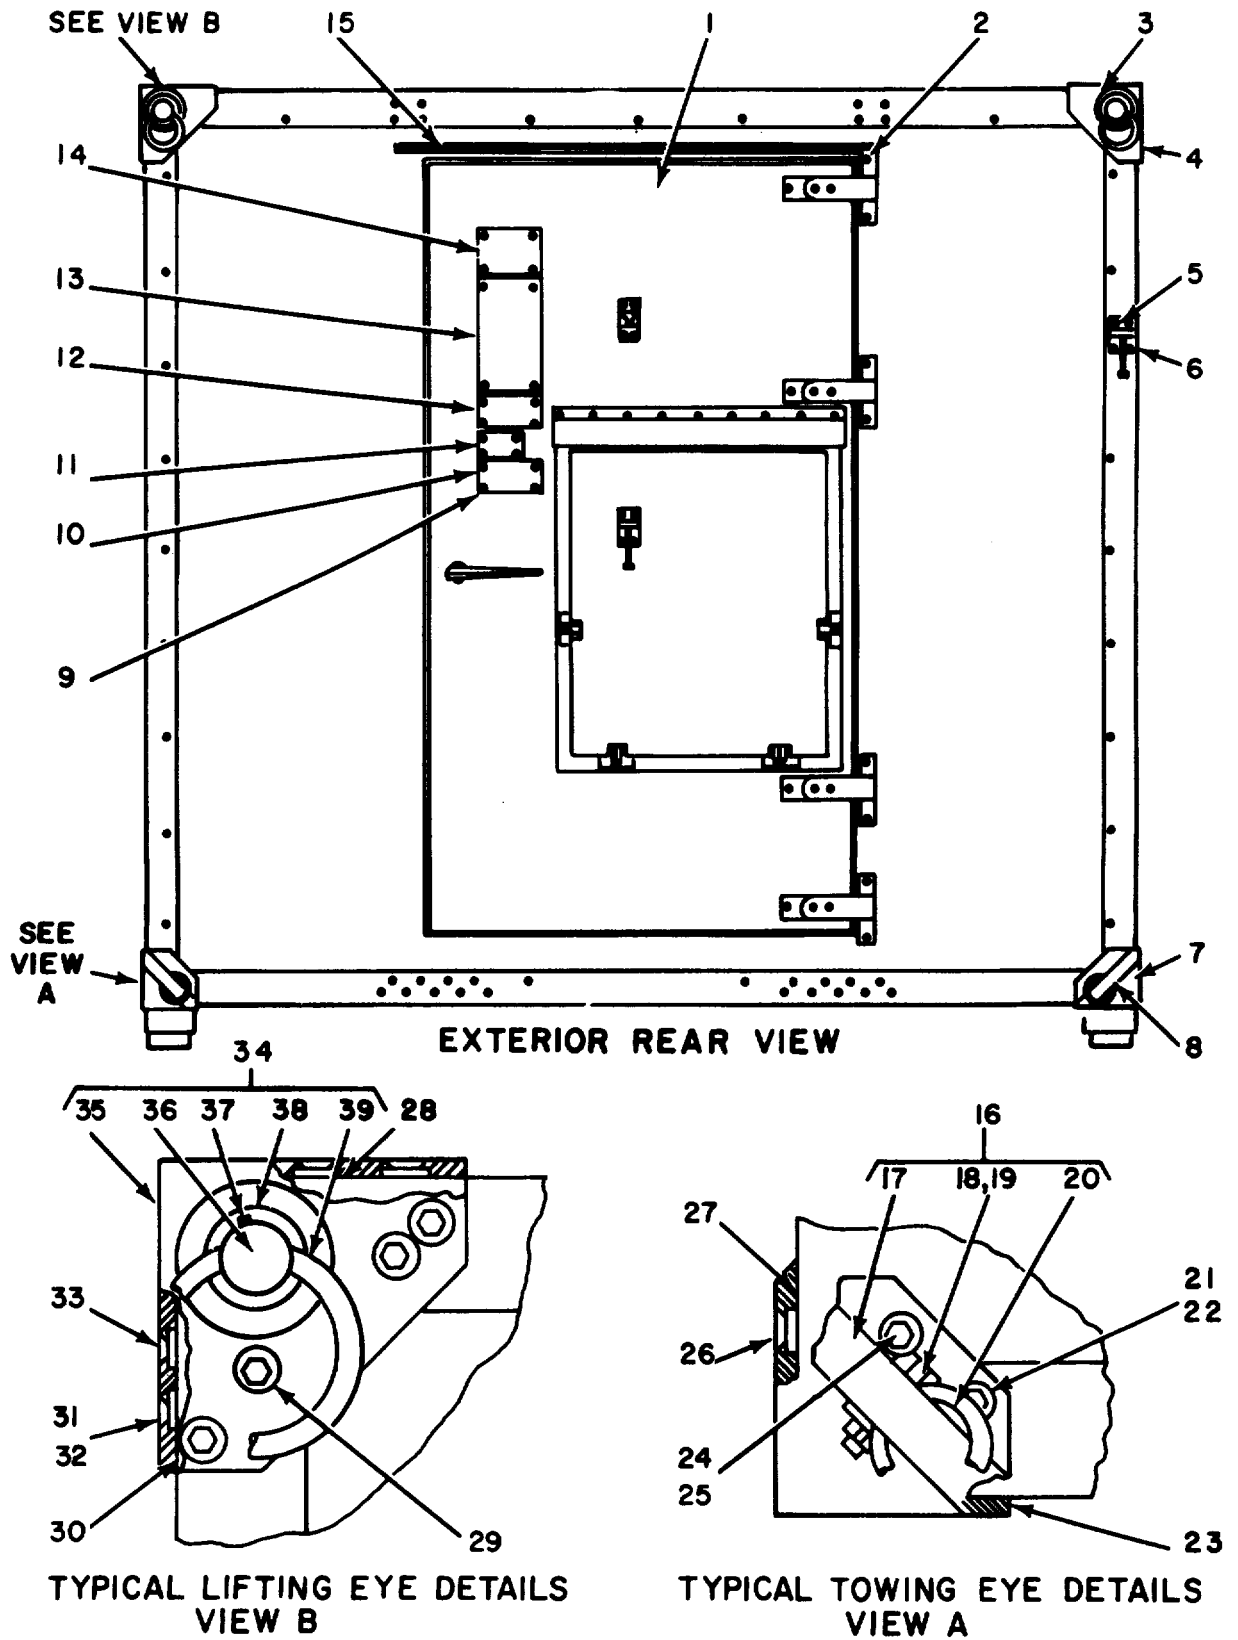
Shelters, Electrical Equipment S-280A/G and S-280/G
